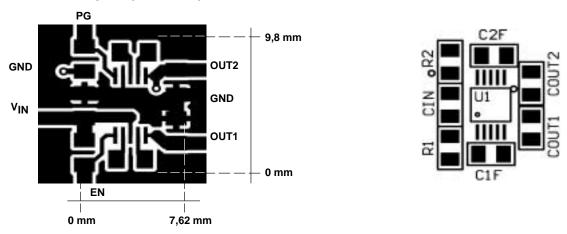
Recommended PCB Layout for TPS6031X (top layer)
